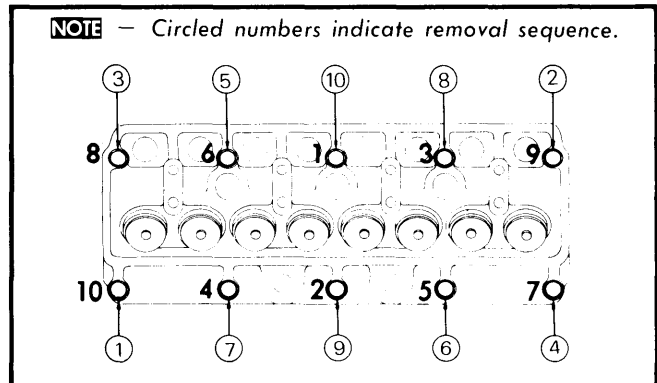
Tighten Cylinder Head in Sequence Shown (Remove in Reverse Order ⑩ Through ①)
